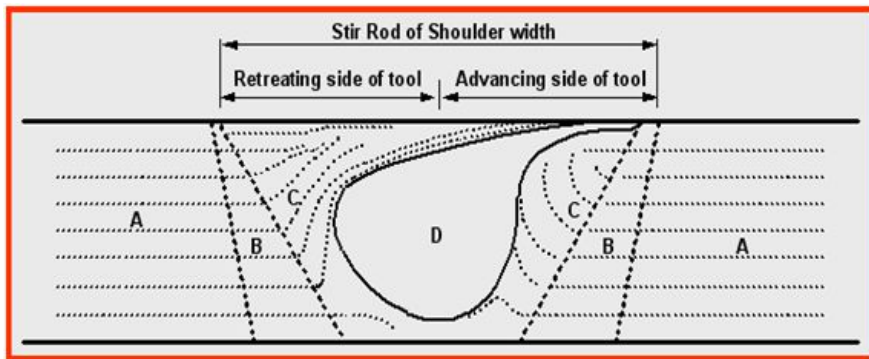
Schematics drawing of Friction Stir Welding process
